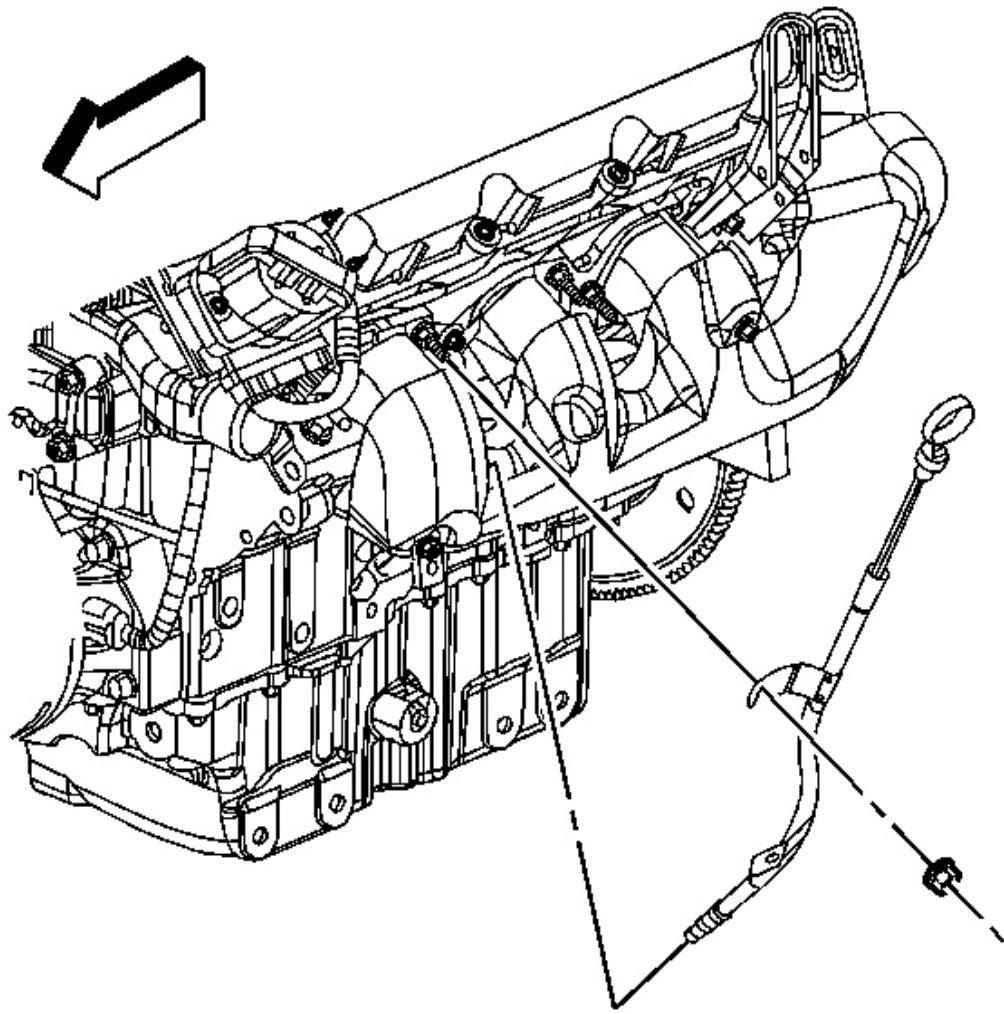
Identifying Positive Crankcase Ventilation (PCV) Tube
